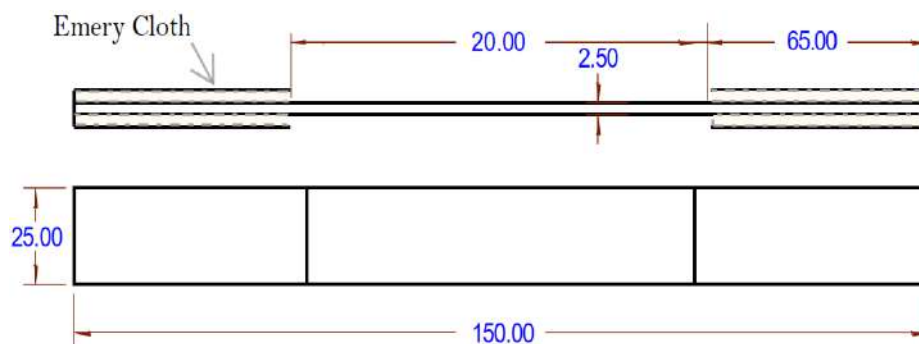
E-glass/Epoxy test specimen Heating Compression Test Specimen
